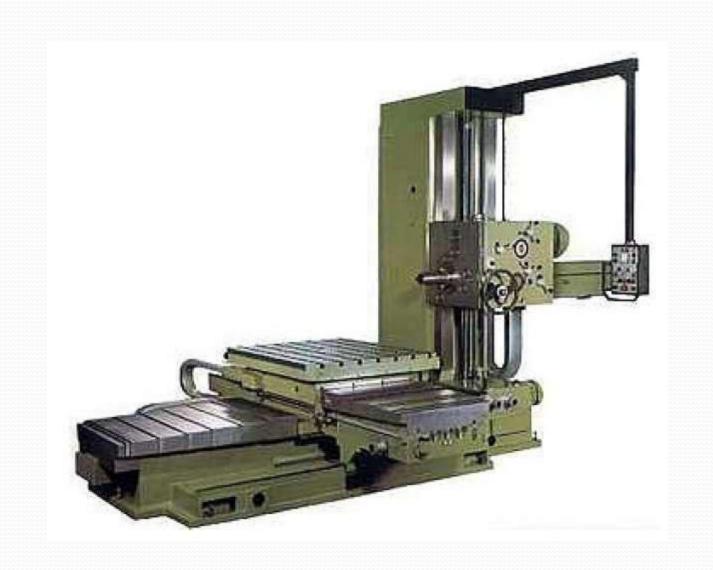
Horizontal boring machine 1. Headstock, 2. Pulley for counter balancing weight of headstock, 3. Headstock elevating screw, 4. Boring head, 5. Boring cutter on boring bar, 6. Work, 7. End supporting column, 8. Bearing block, 9. Saddle, 10 Cross-slide, 11. Table.
